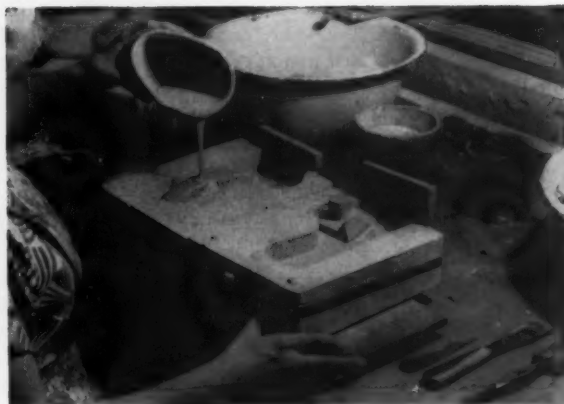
Pouring refractory slurry from rubber bowl. Mold members held together by rubber bands.
